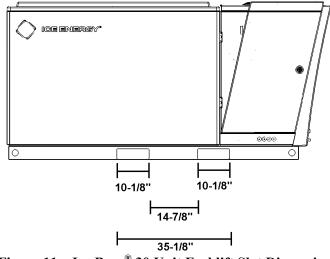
Ice Bear[®] 30 Unit Forklift Slot Dimensions
